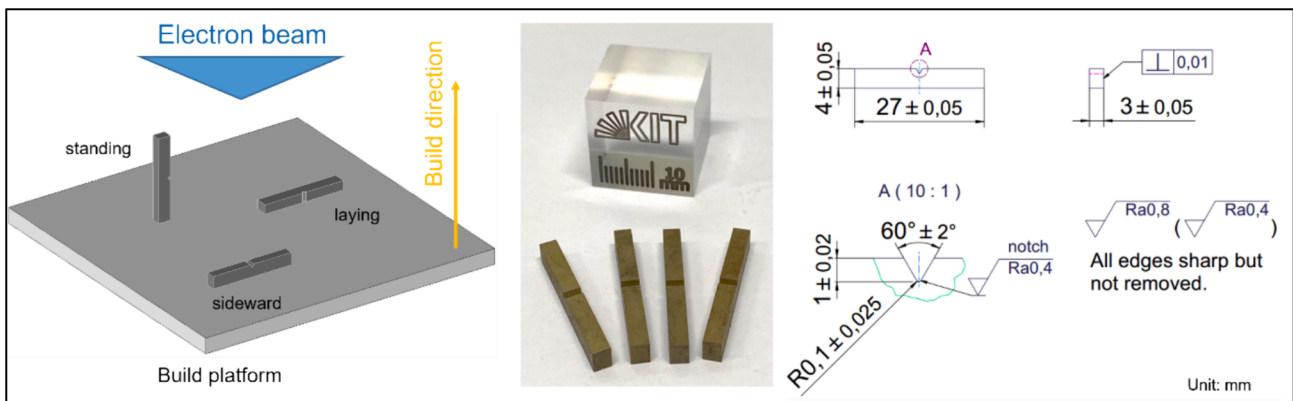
Fabrication of KLST Charpy-V impact test samples. Left. layout of the build direction on the built platform, middle. finished samples, right. sketch of the used KLST samples.
